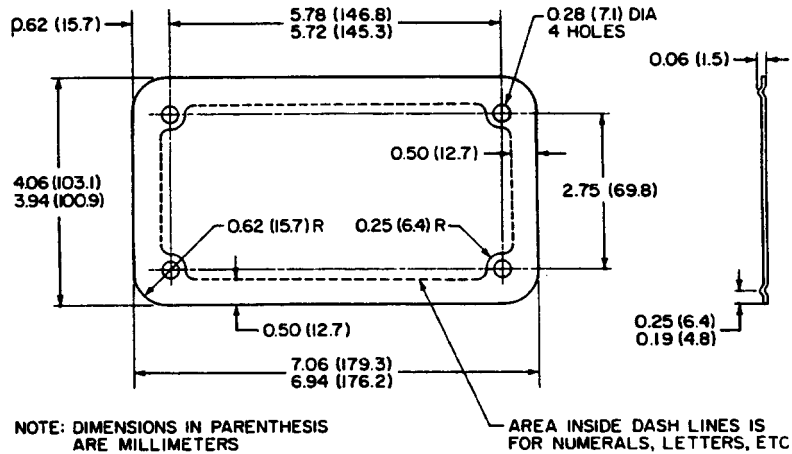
DIMENSIONS FOR MOTORCYCLE AND MOTOR DRIVEN CYCLE LICENSE PLATES
